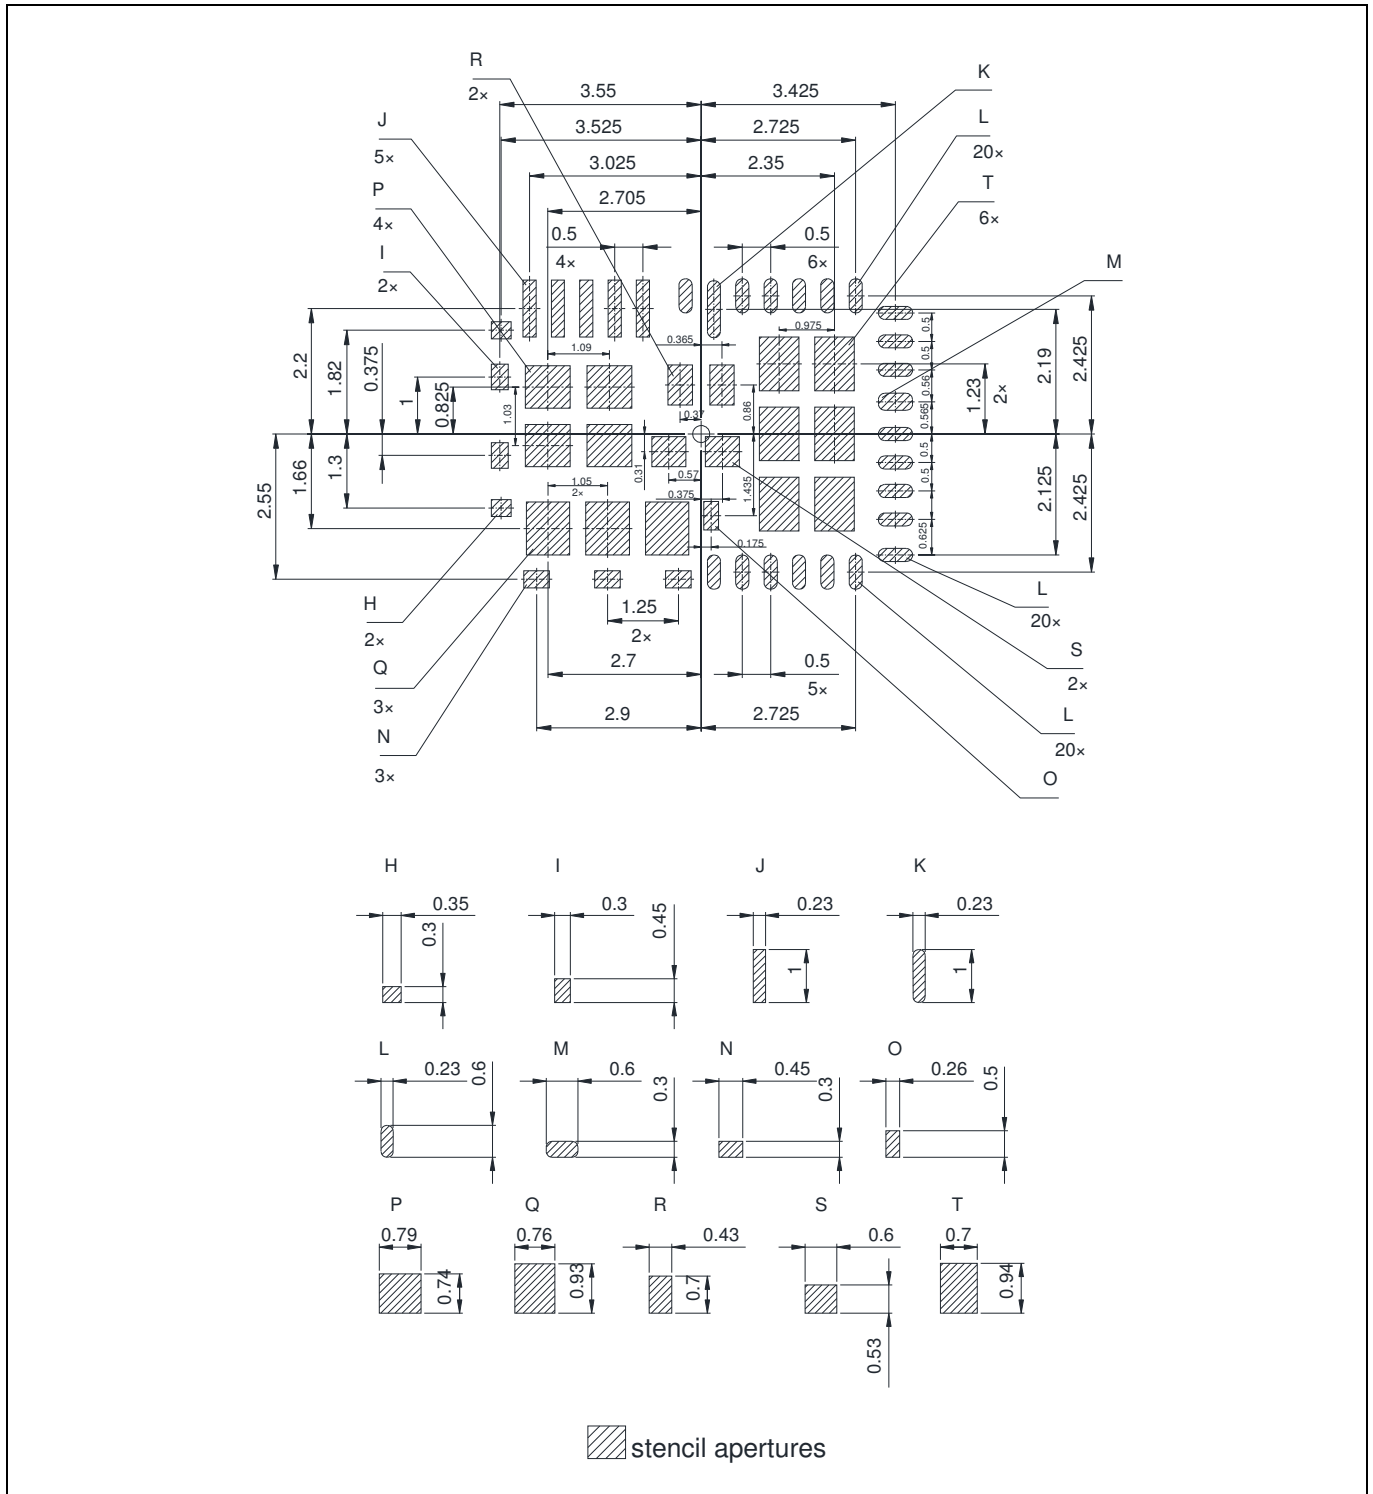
Stencil pad size and spacing (all dimensions in mm)
